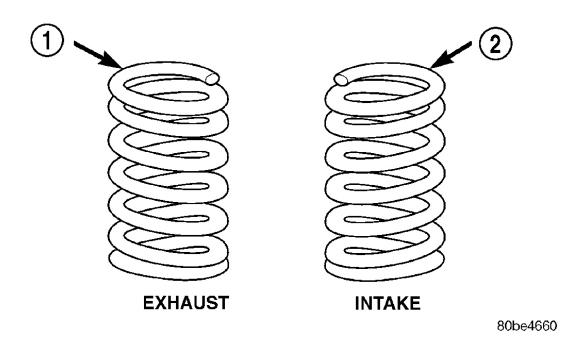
Valve Spring Identification Courtesy of CHRYSLER LLC
